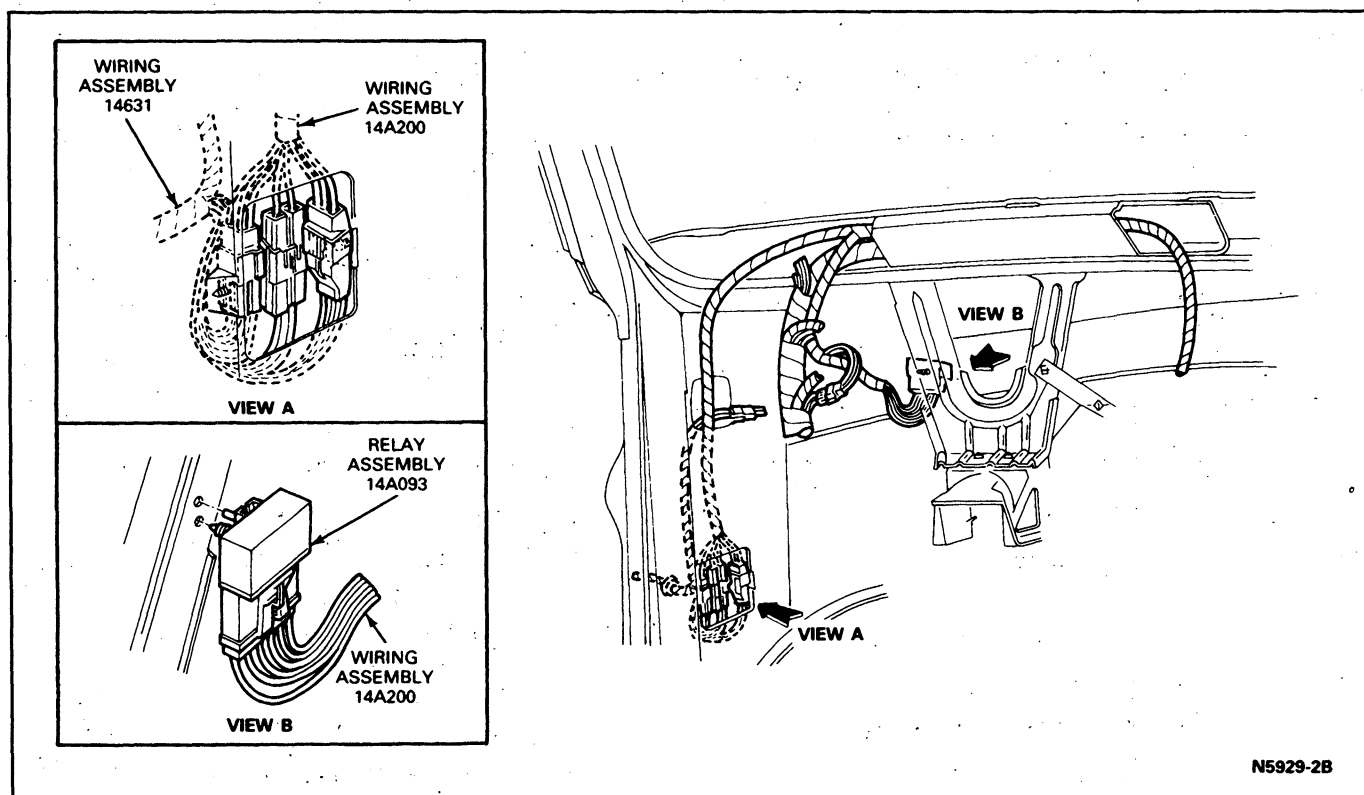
Door Lock Relay Assembly Removal—E-150—E-350
